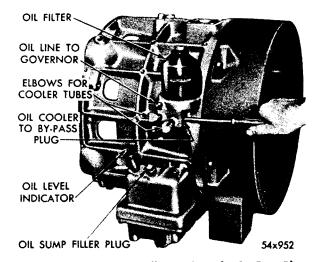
Removing or Installing Oil Cooler By-Pass Plug
